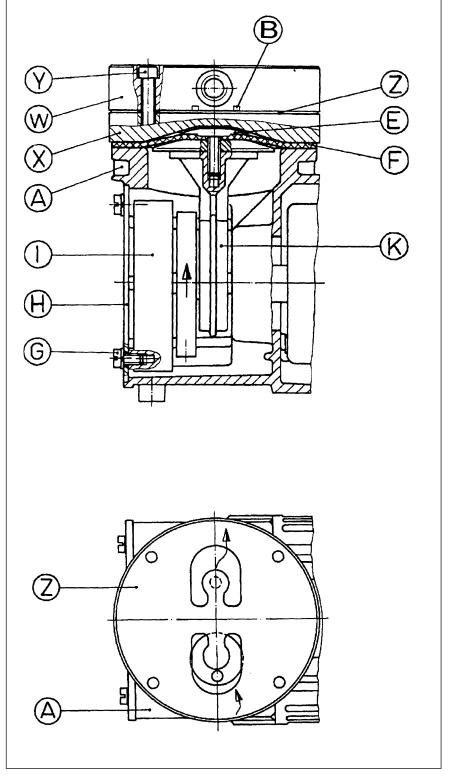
Pump parts for pump models with smooth heads and valve plate (elastomer, symbolic)
